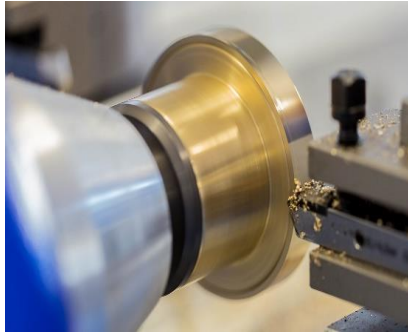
Forming metal jewelry pieces using a CNC lathe machine
